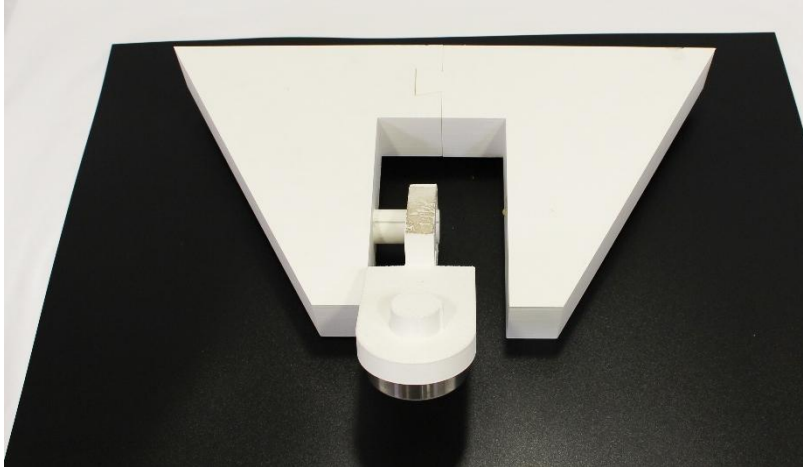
Yaw and pitch rotation check of Dual Axis one way bearing systems- mark 3- assembly type 3
